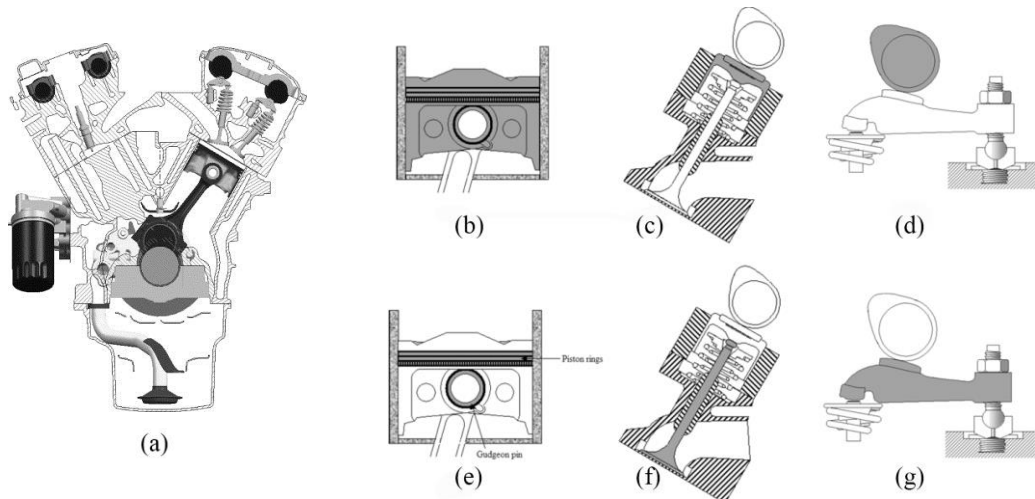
(a) Cross-section through a V6 engine with a valve train mechanism of centre pivot rocker arm or centre pivot rocker with a lifter with commonly coated parts highlighted in grey. (b) piston (c) tappet (d) camshaft (e) piston and gudgeon (f) valve stem and head (g) rocker arm [8, 19]
